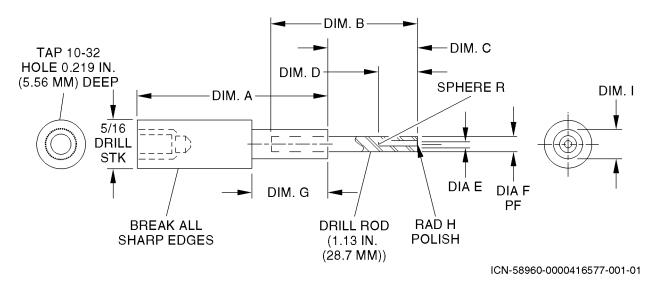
Contact Seating Inspection Kit Contact Adapter, T3009406-4
